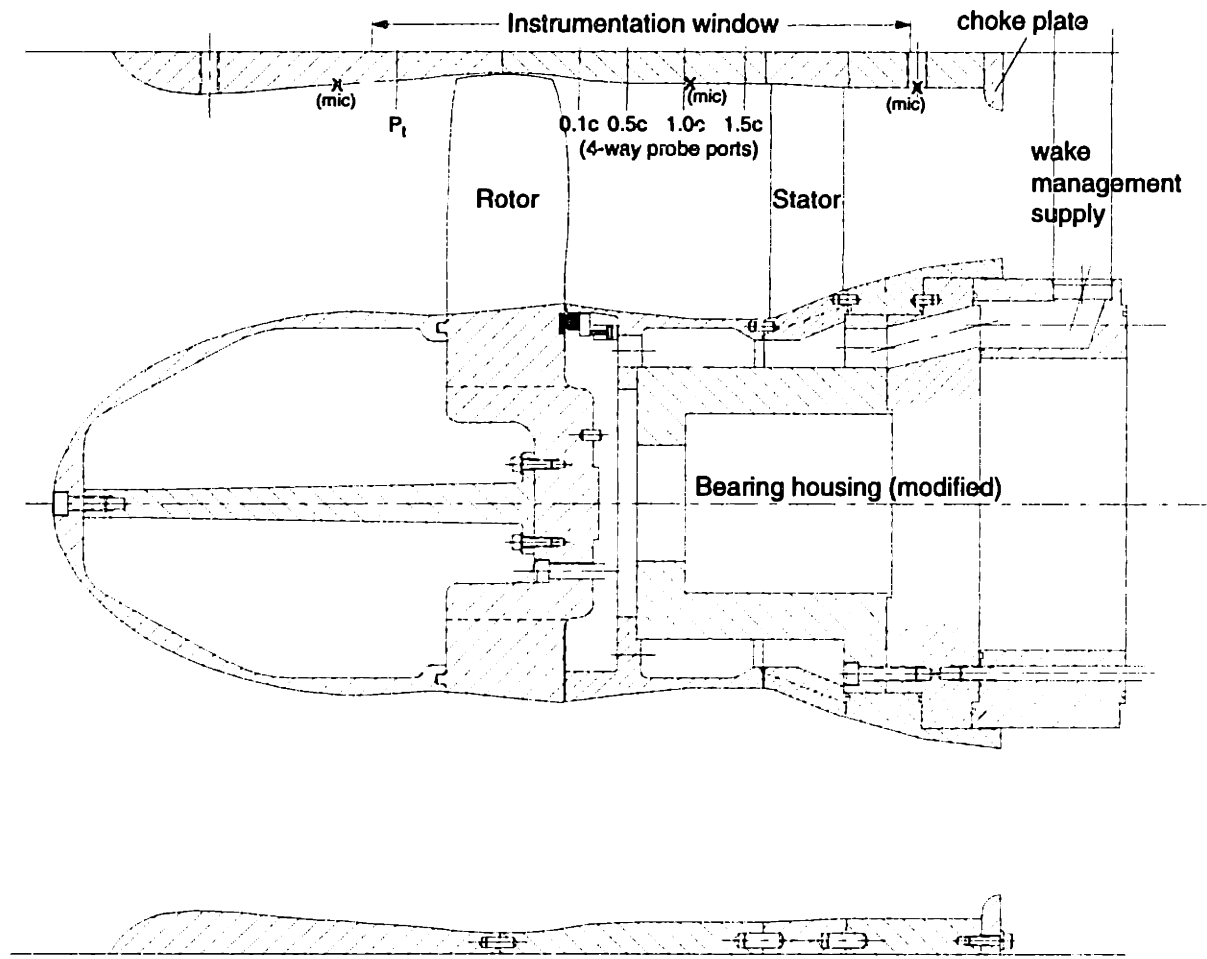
Layout drawing of the wake management fan stage in the Blowdown Compressor
